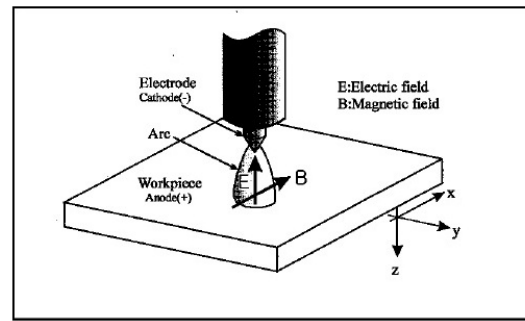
Welding operation with the developed system Fig 2 illustrates the experimental set up condition for improving weldability by providing external variable magnetic field.
